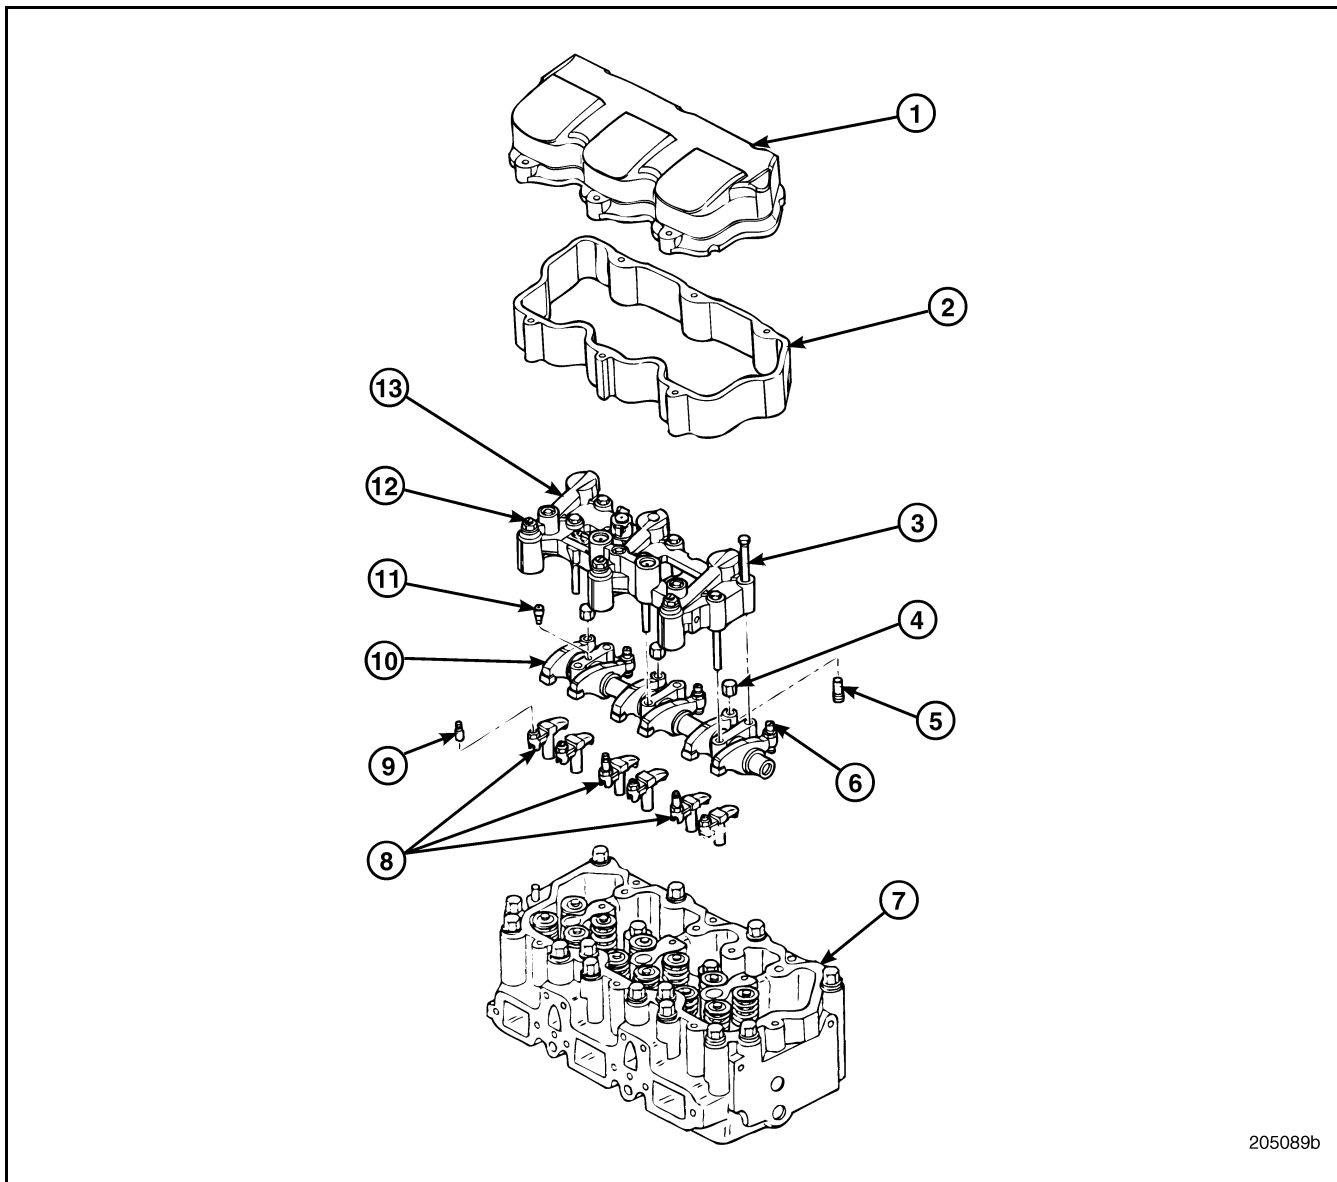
Rocker Arm Shaft and Engine Brake Assembly
